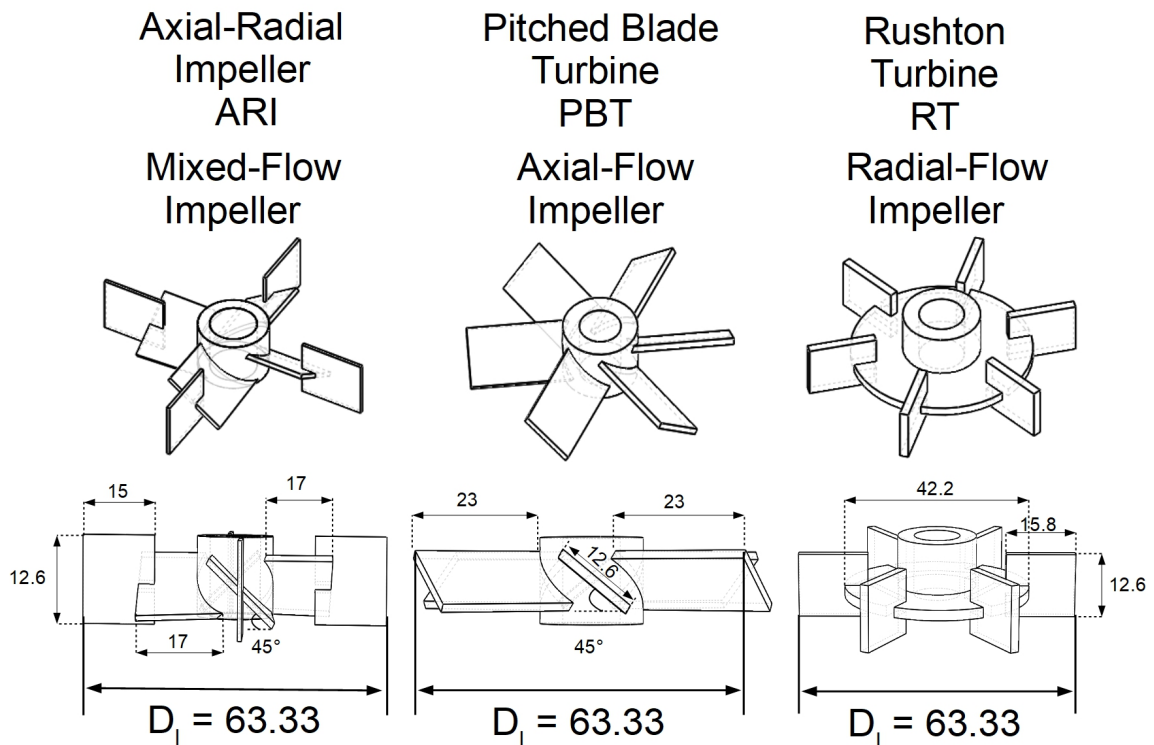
Impellers used in this study. Dimensions in millimeters.
